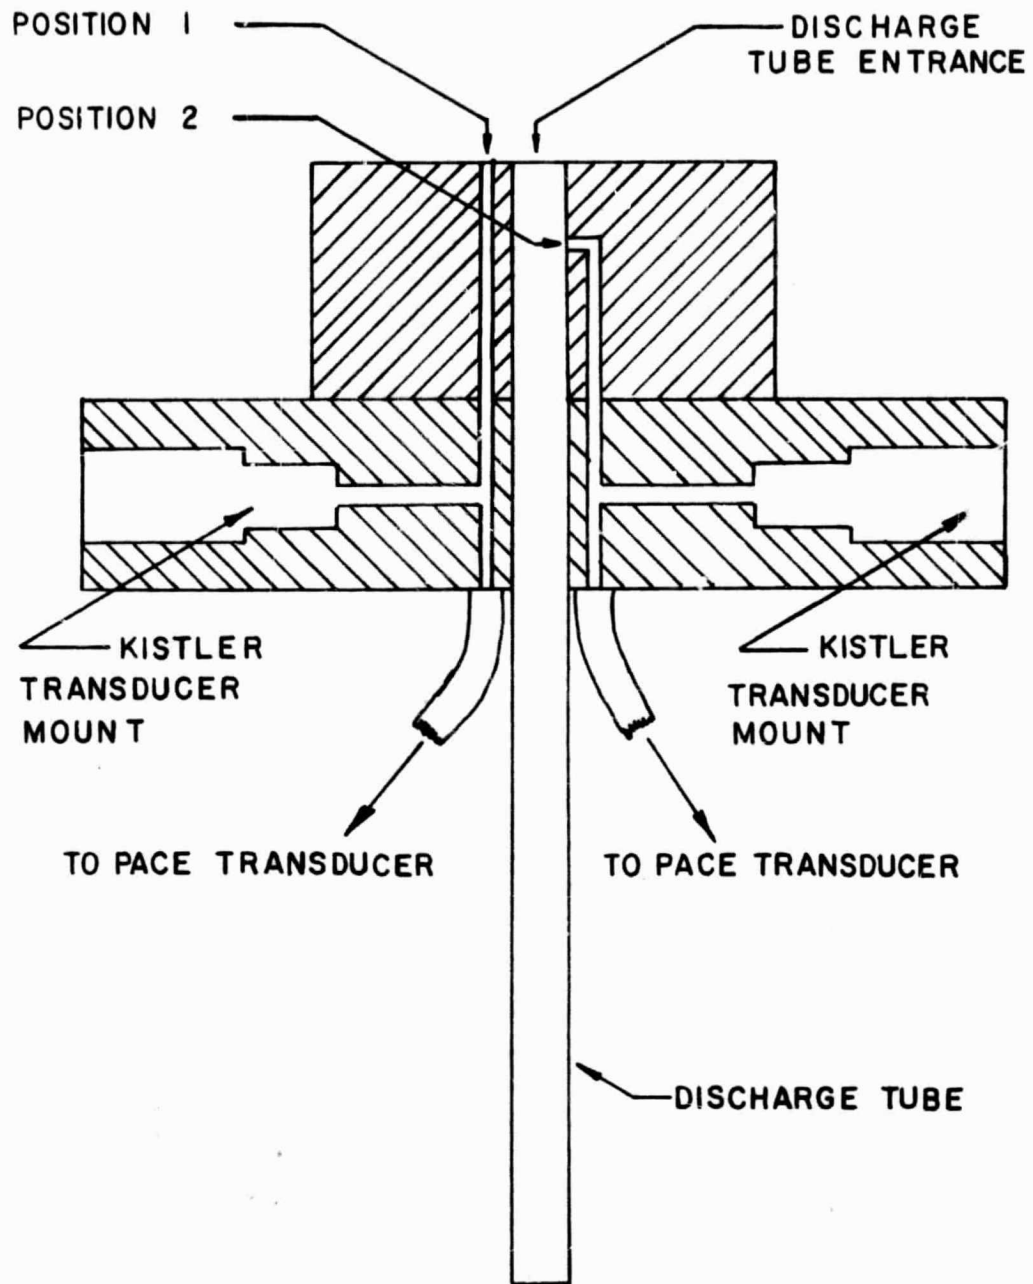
Discharge Tube Adaptor With Pressure Tap Positions
